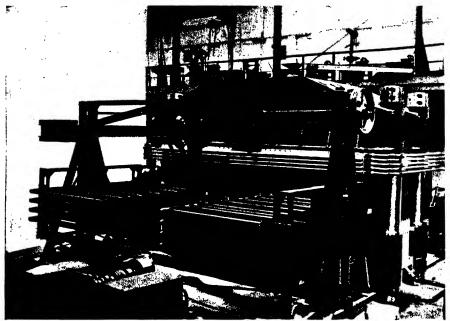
A Modern Hot-Plate Press with 4 "Daylights" showing Loading Mechanism.
